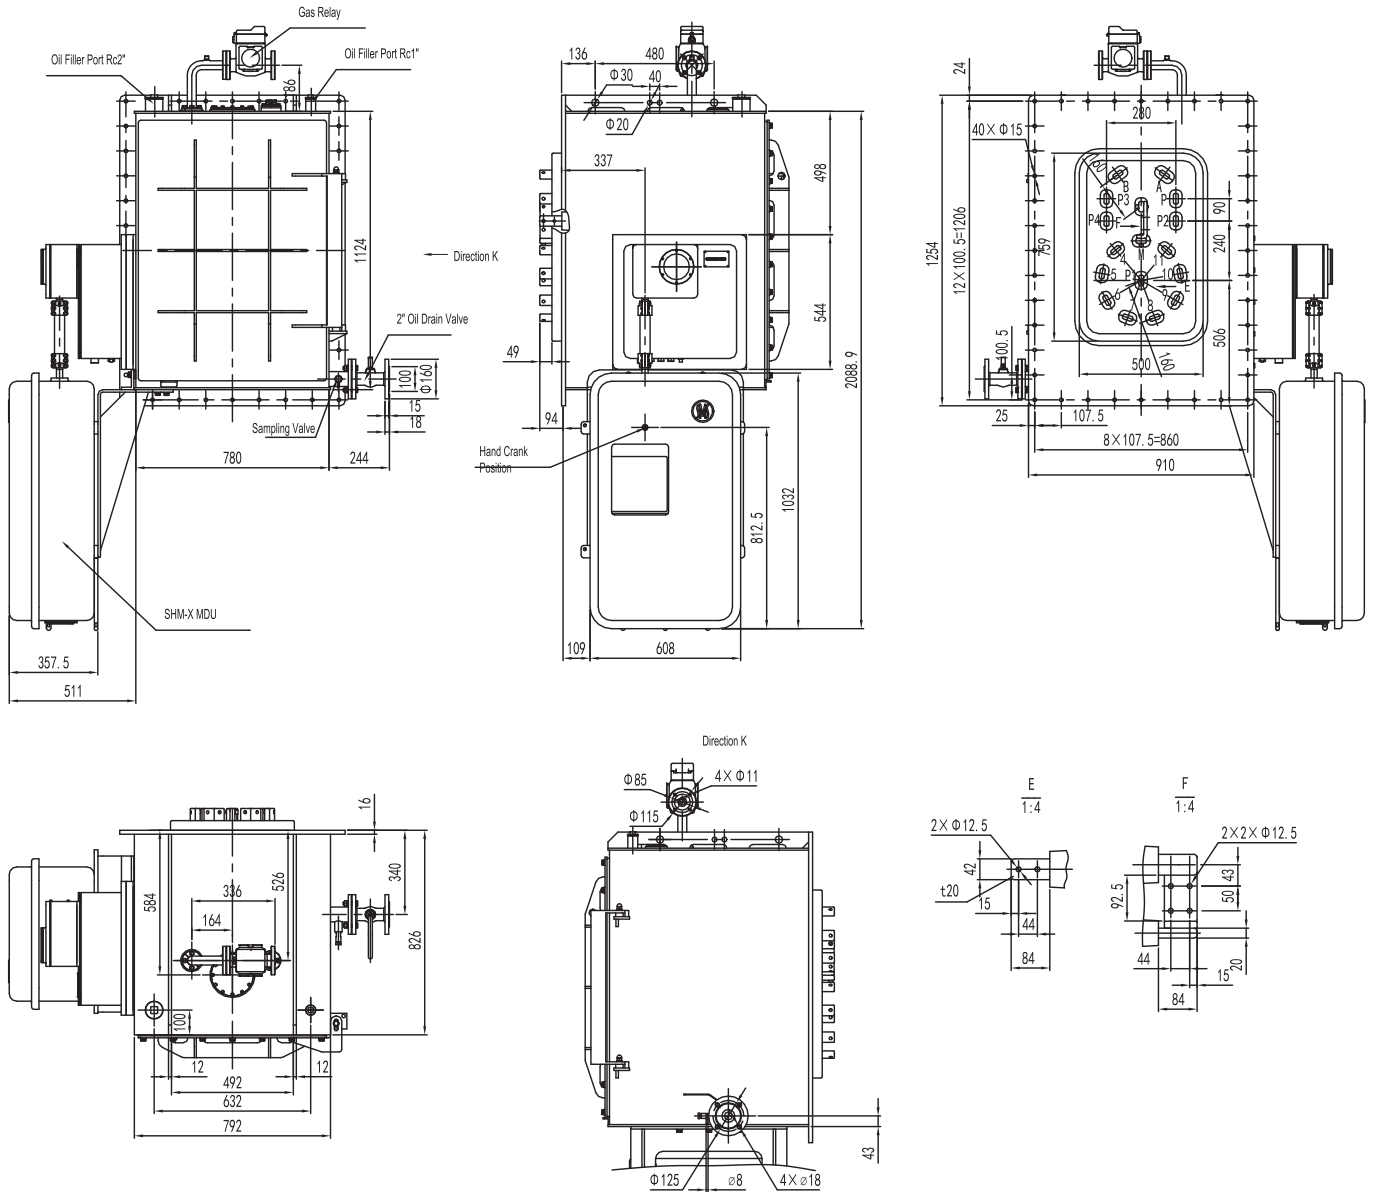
HWDK Single-Phase (Non-Standard) External Reactance-Type Vacuum OLTC Dimensions
